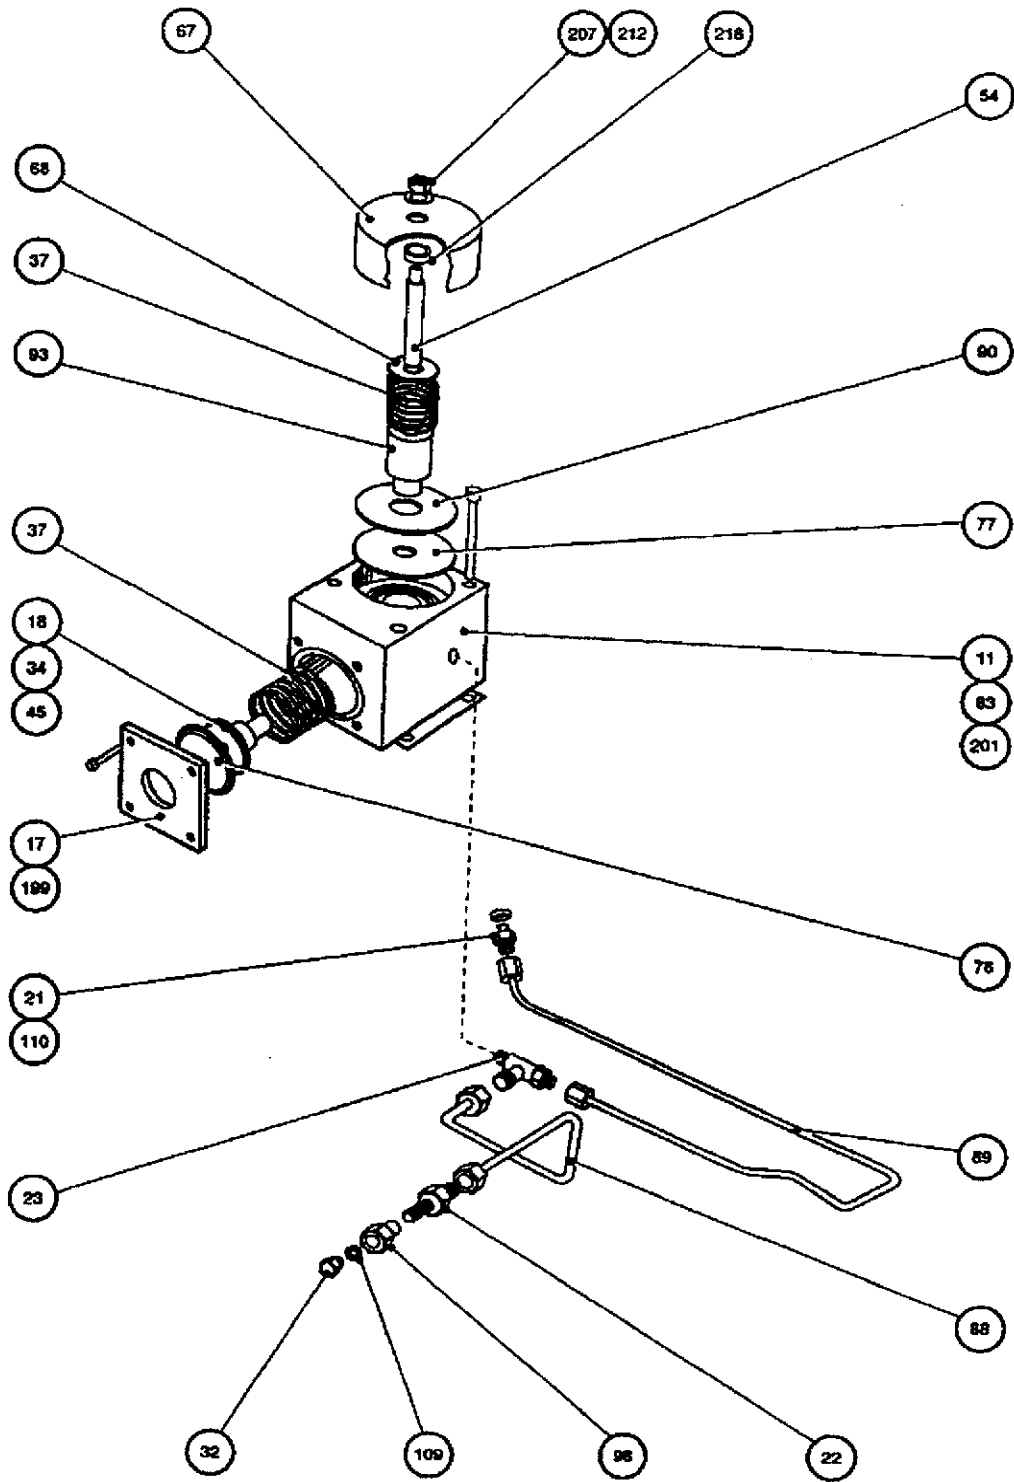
(E) E2M175S/E2M275S Oil distributor sub-assembly
